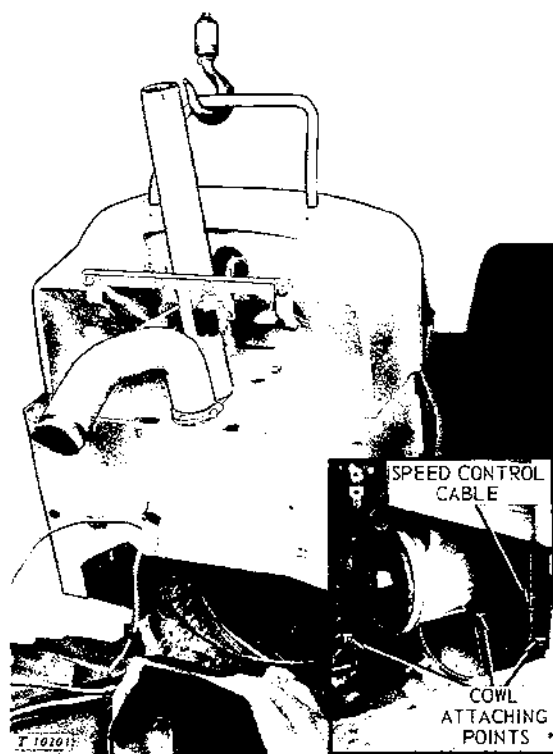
Removing Cowl Support (Tractors without Loaders)
